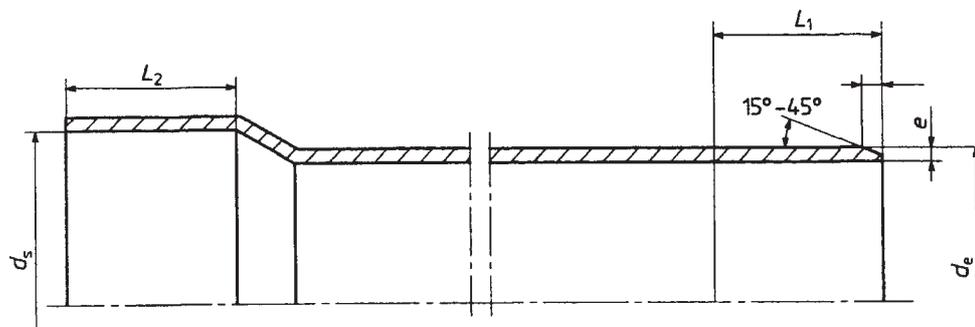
Basic dimensions of sockets and spigot for solvent cement joints
